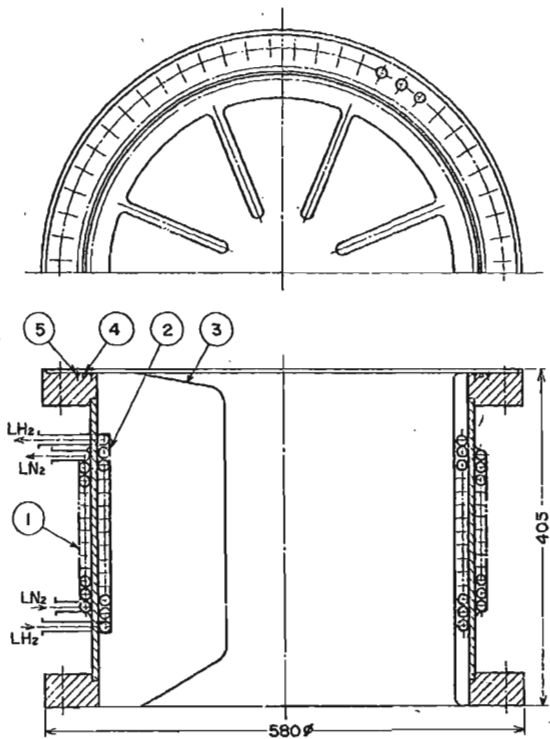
Cross section of the neck-cooler cylinder. (1) pre-cooling line, (2) cooling line, (3) copper fin, (4) guard vacuum groove, (5) indium seal.
